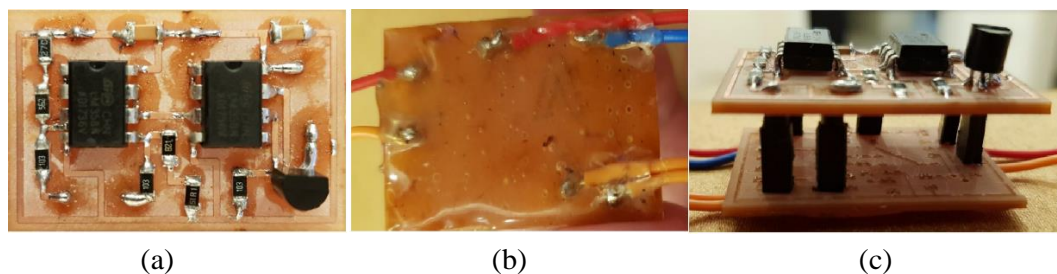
Real Results of the Neurocomputing Taste System Design: (a) Real Result of the PCB Manufactured with Soldered Components. (b) Bottom View of the Lower Layer of PCB. (c) Side View of the PCB.
